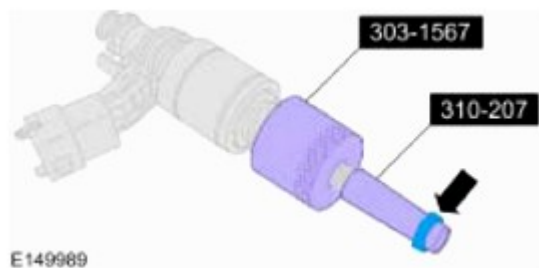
Installing Lower Teflon® Seals On Narrow End Of Arbor
